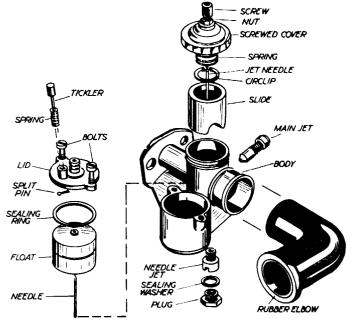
An Exploded View of the Carburettor Showing All Parts
